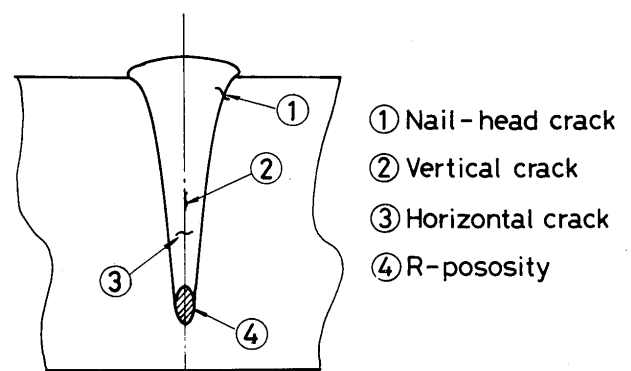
Schematic configuration of weld defects occurred in dissimilar welded joint
